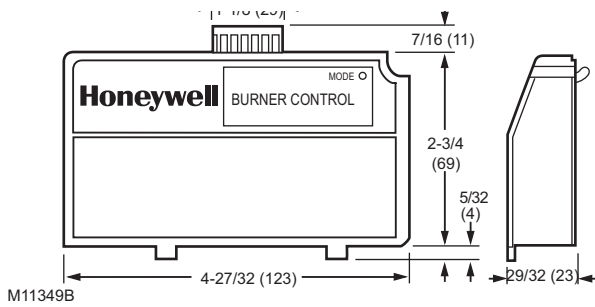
Mounting dimensions of S7810M ModBus™ Module in in. (mm).
